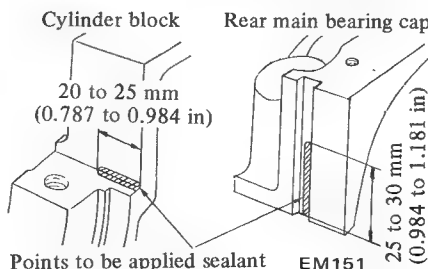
Applying sealant (Main bearing cap and cylinder block)
